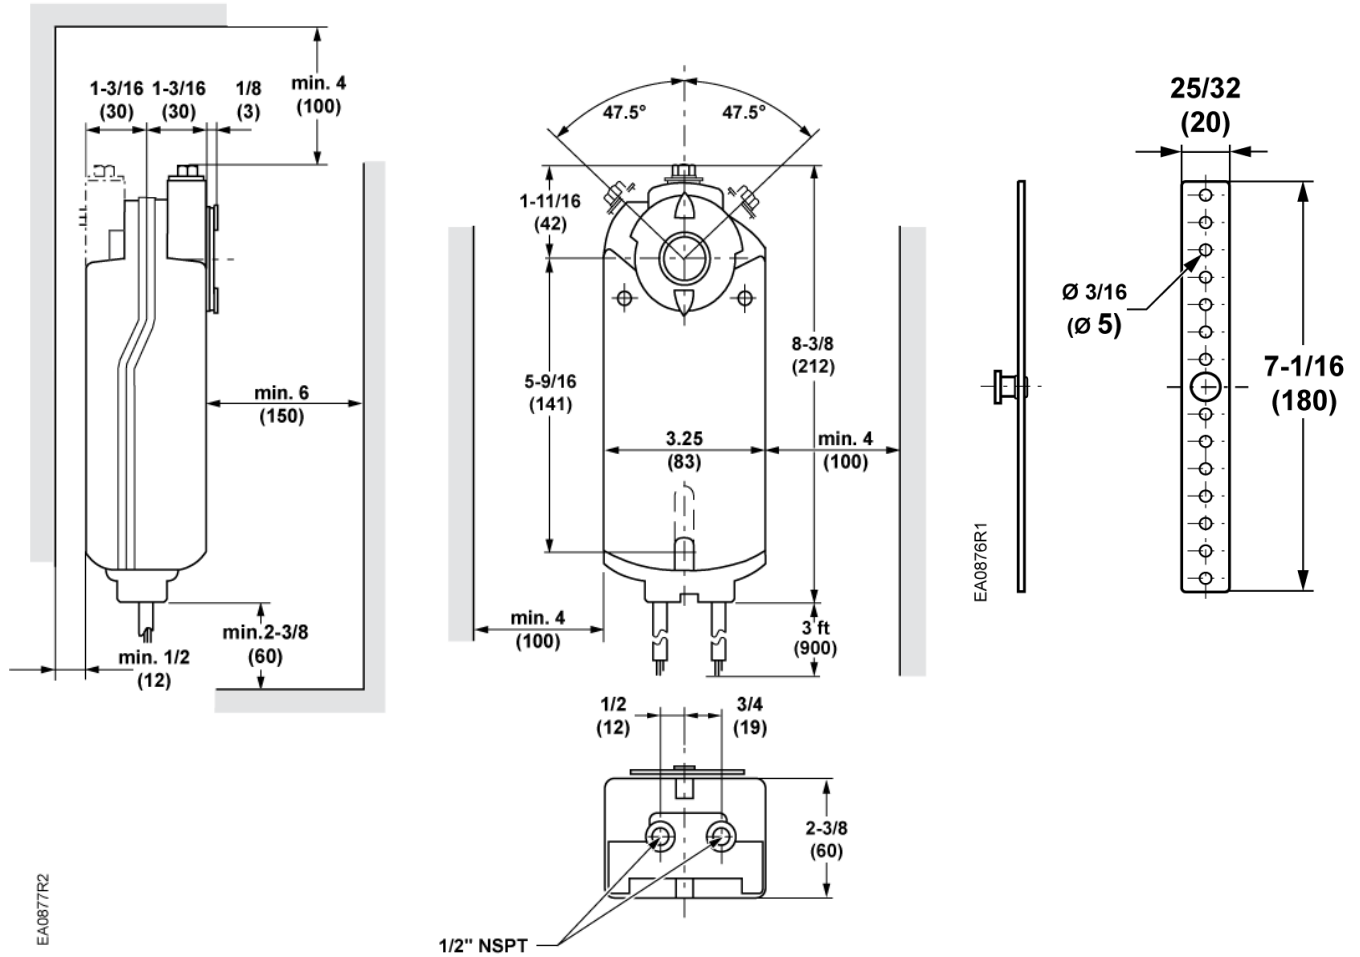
GMA Actuator and Mounting Bracket Dimensions.
